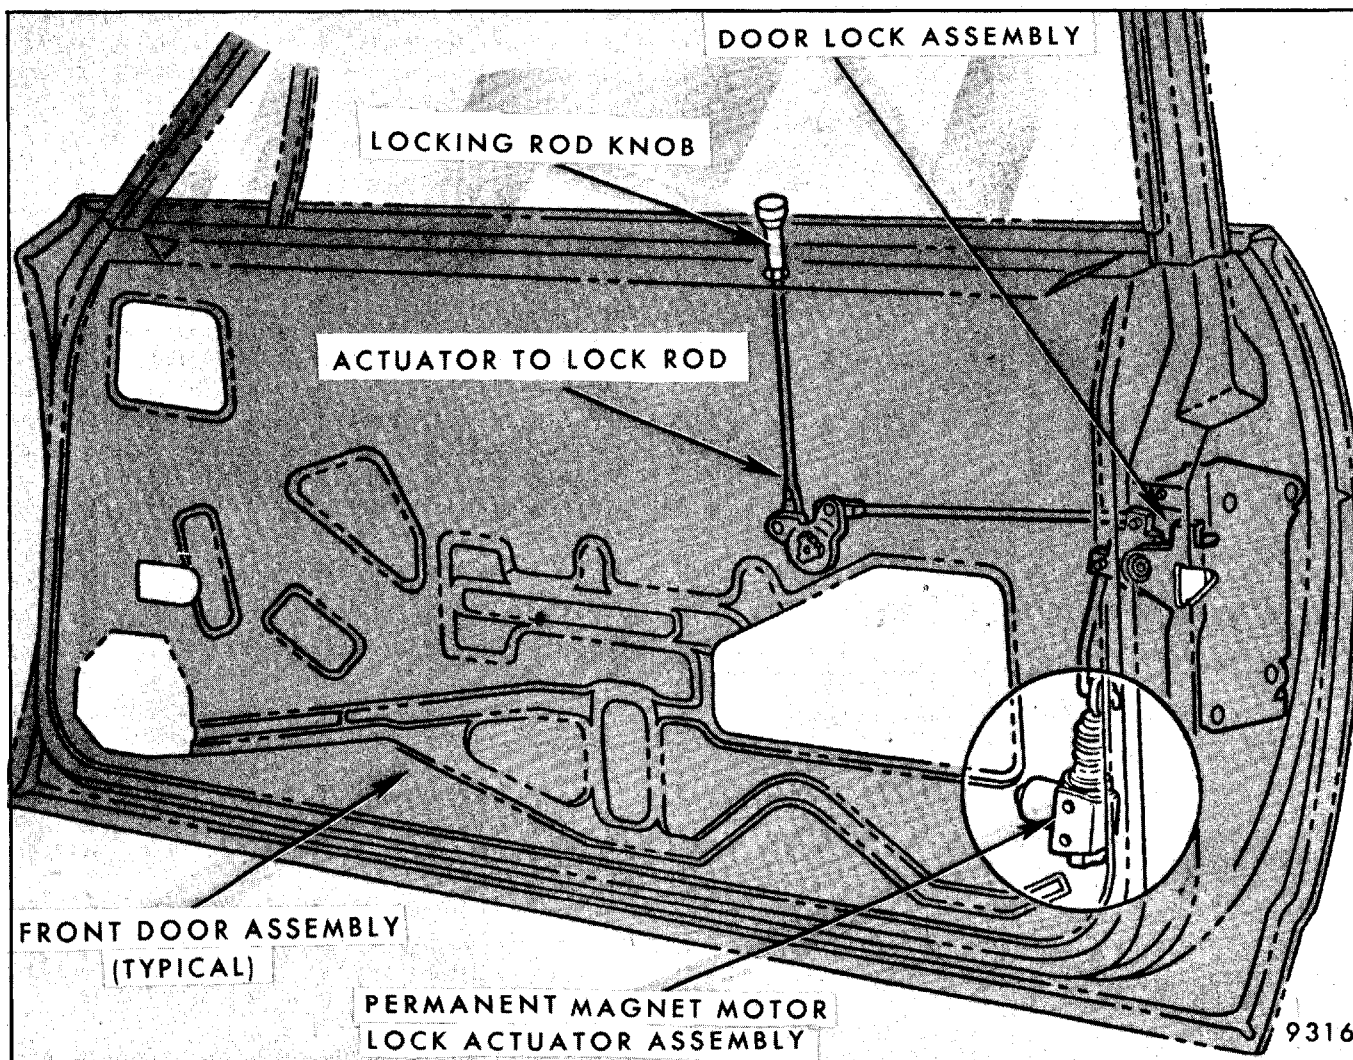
Permanent Magnet Motor Door Lock Actuator Location (Typical)
